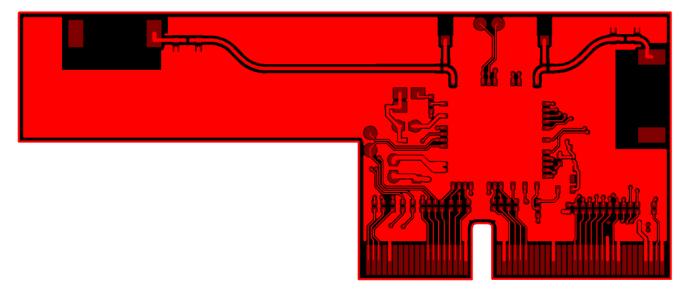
WL1837MODCOM8I Layer 1 Layout
